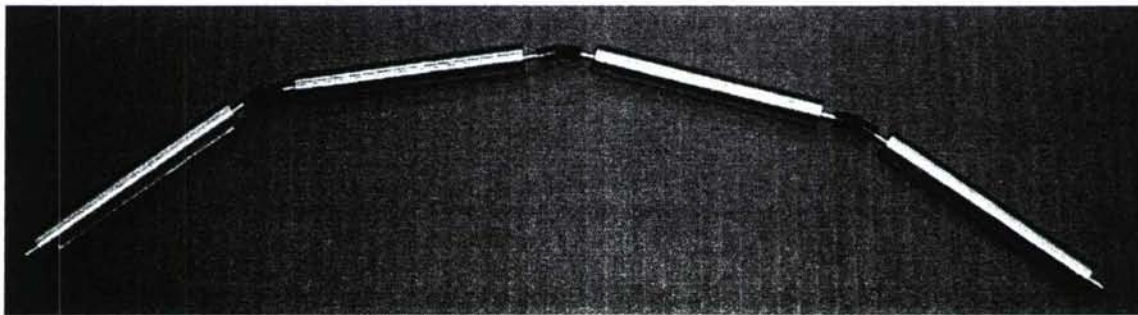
Slotted Shaft Valves Linked with Universal Joints
